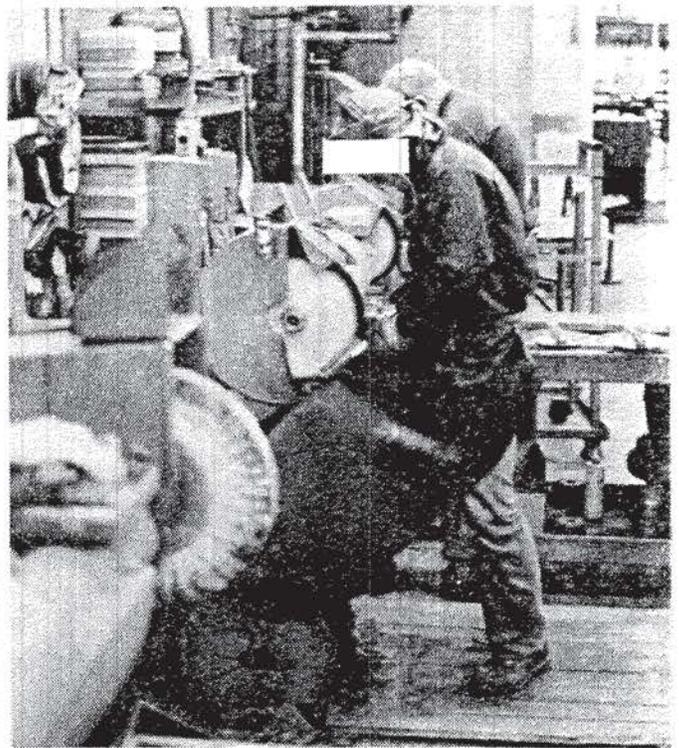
Polishing brass sterilizer door. Note footstand and wood platform.
